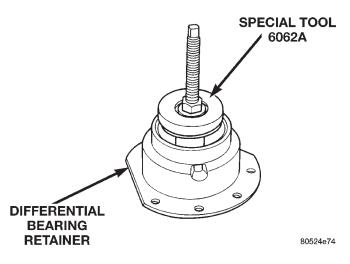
Position Bearing Cup Remover Tool in Retainer
